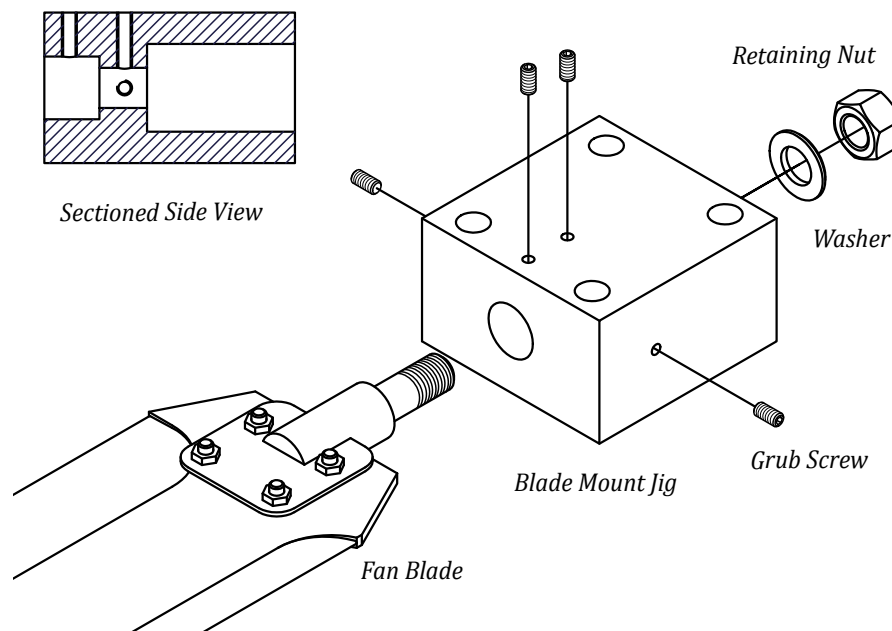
Exploded view detailing how the fan blade was secured in the blade mount jig.
